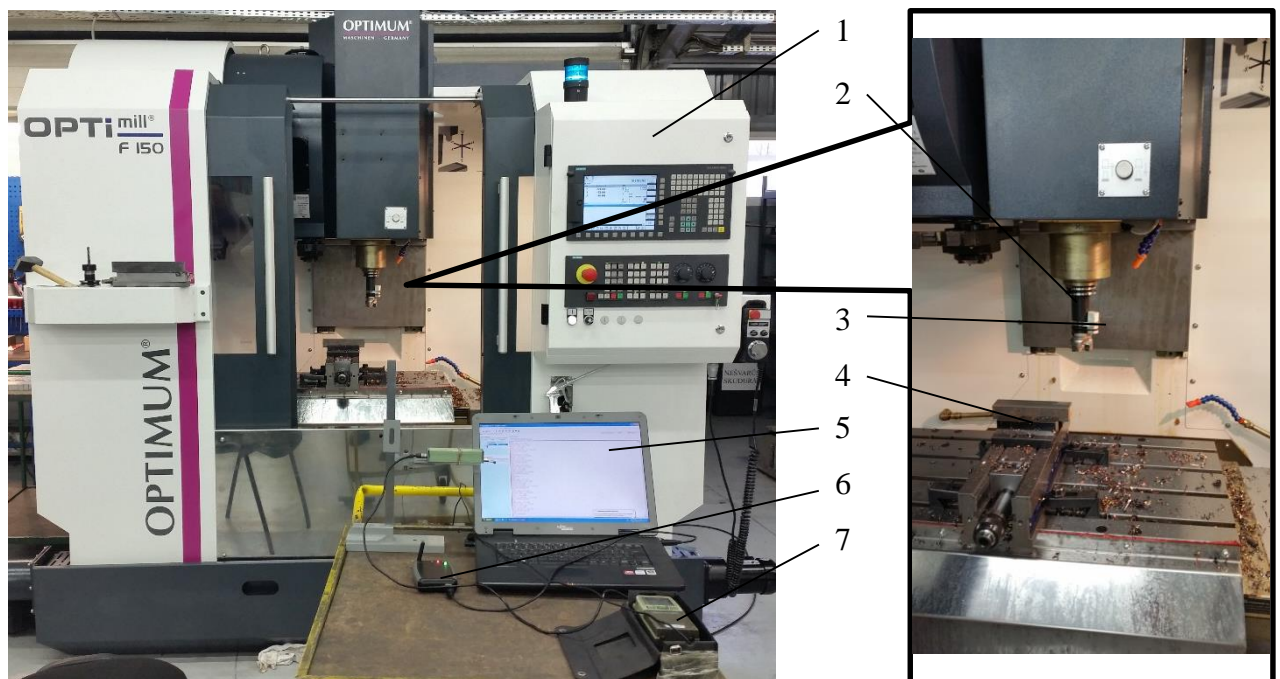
Experimental equipment: 1 - CNC milling lathe Optimum Optimill F150; 2 - four teeth end mill; 3 - wireless sensor node; 4 - steel workpiece 1.0037; 5 - laptop with software; 6 - wireless receiver; 7 – surface roughness measuring device
